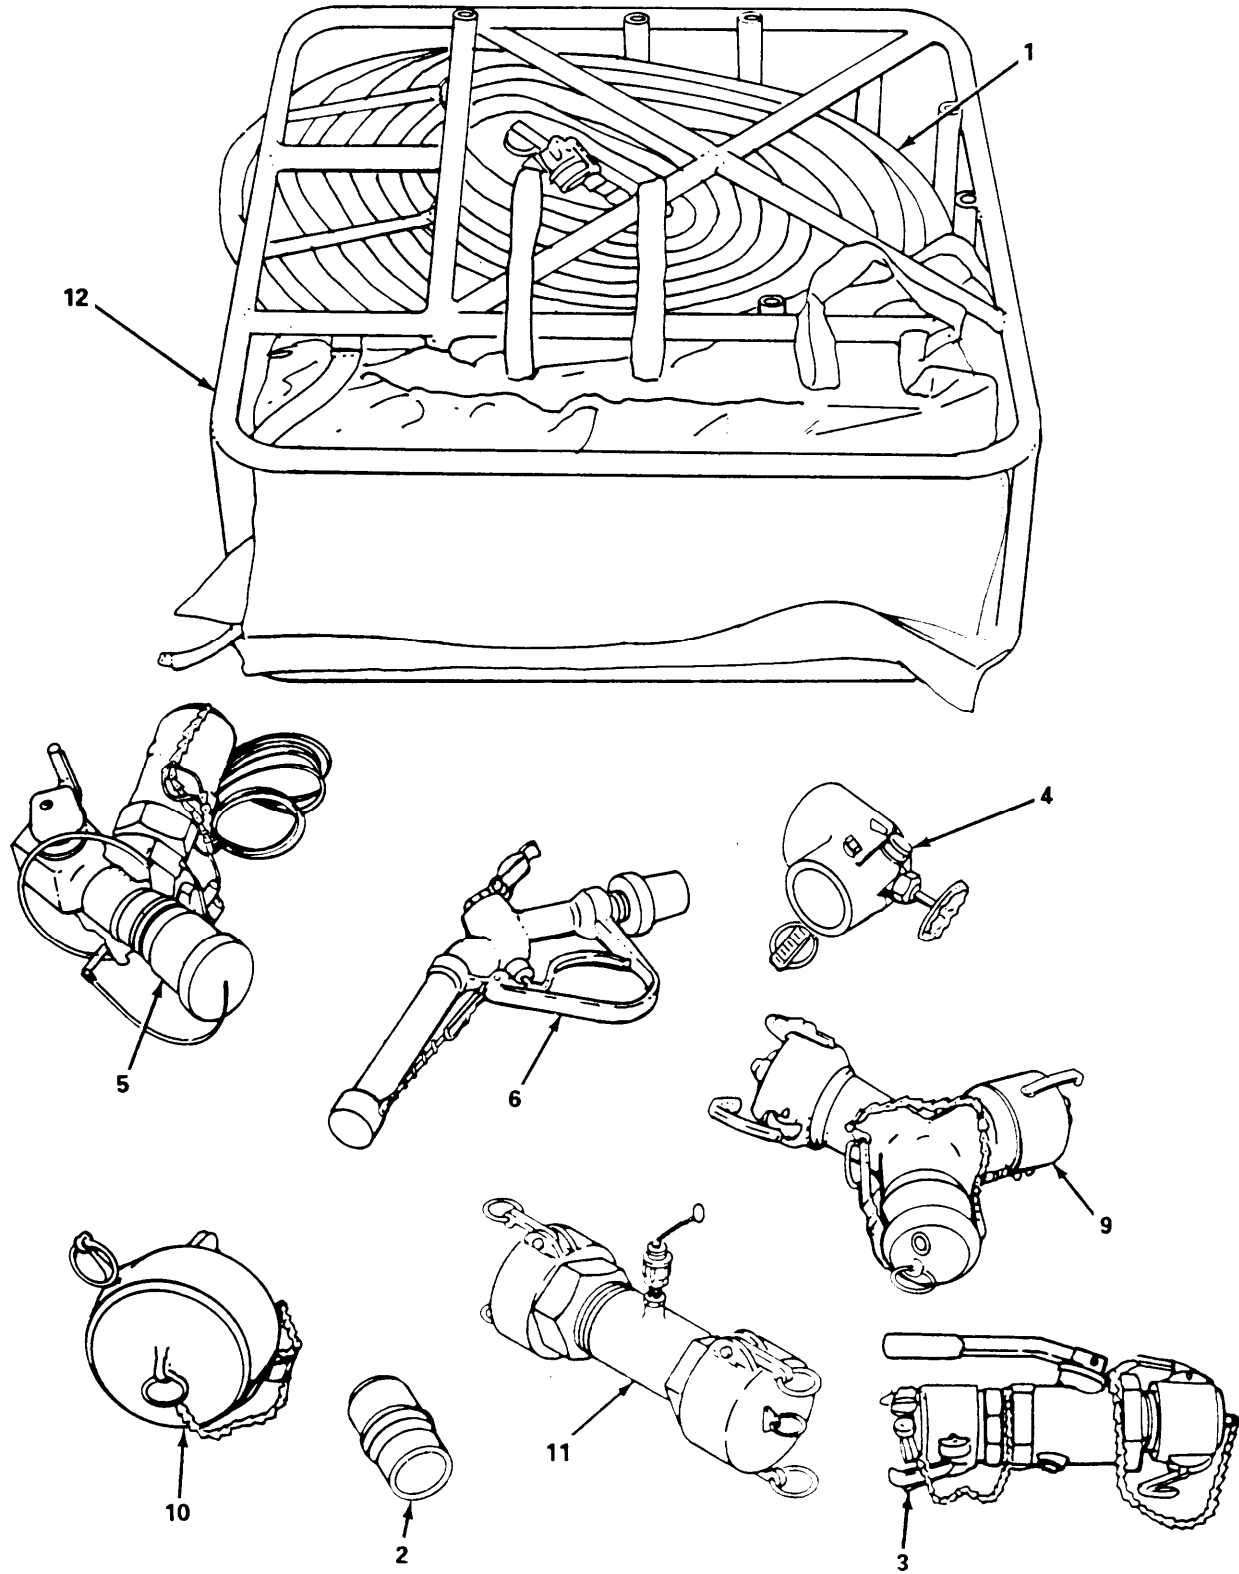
Filter/Separator Assembly (Sheet 2 of 2).
